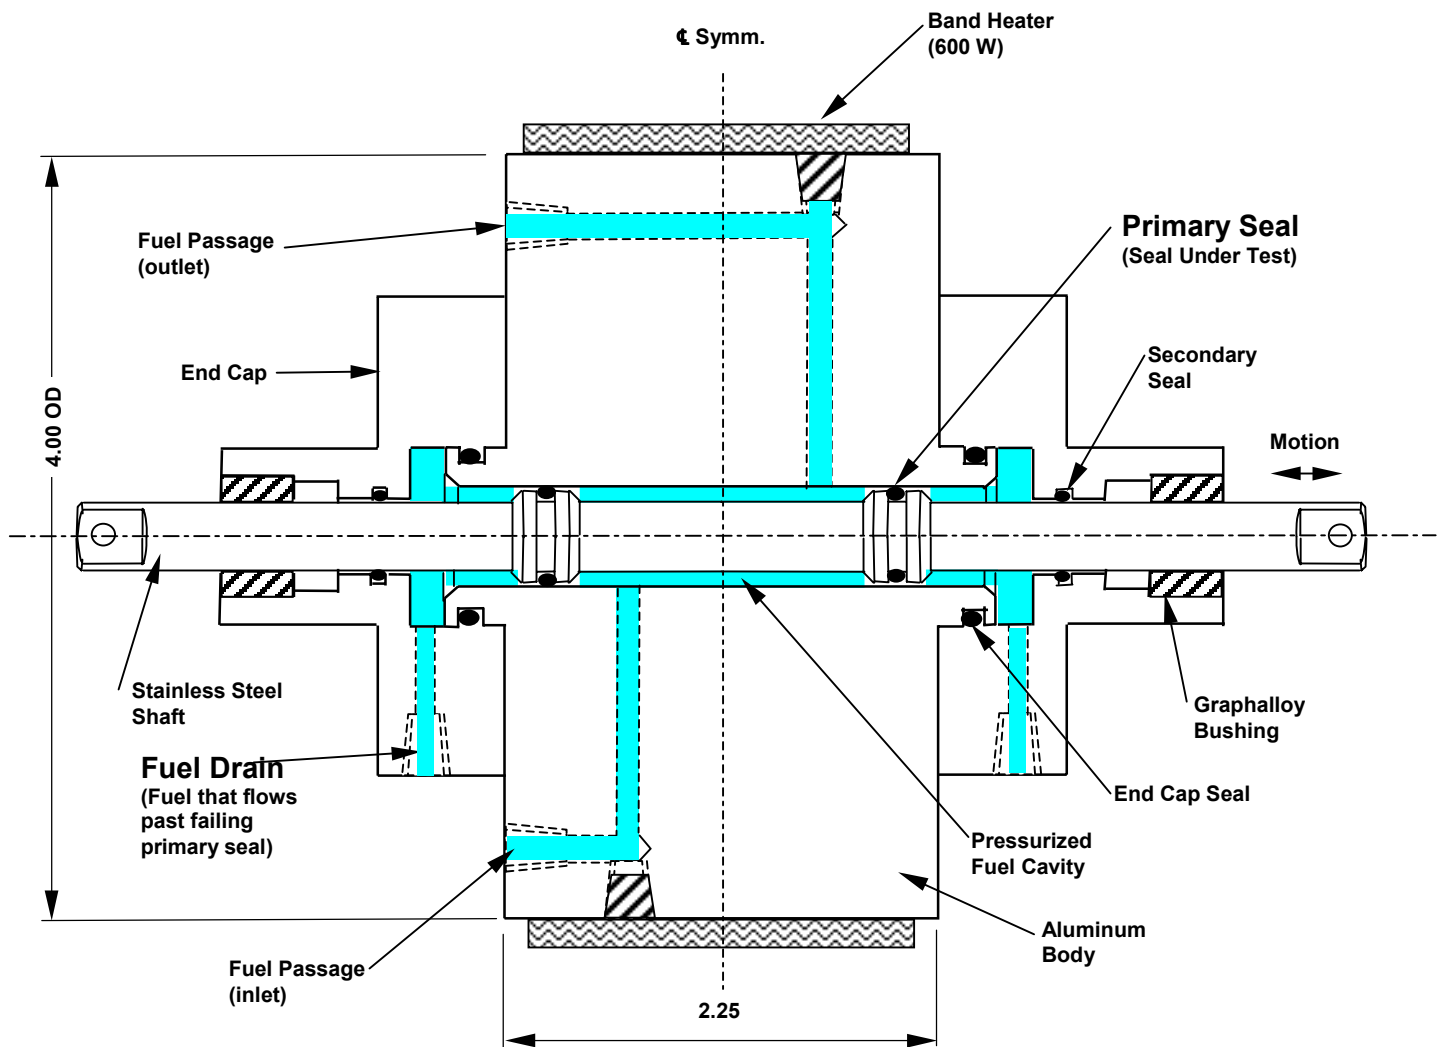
Schematic of a “spool valve” assembly used for determining leakage rate of a seal under test (primary seal).
